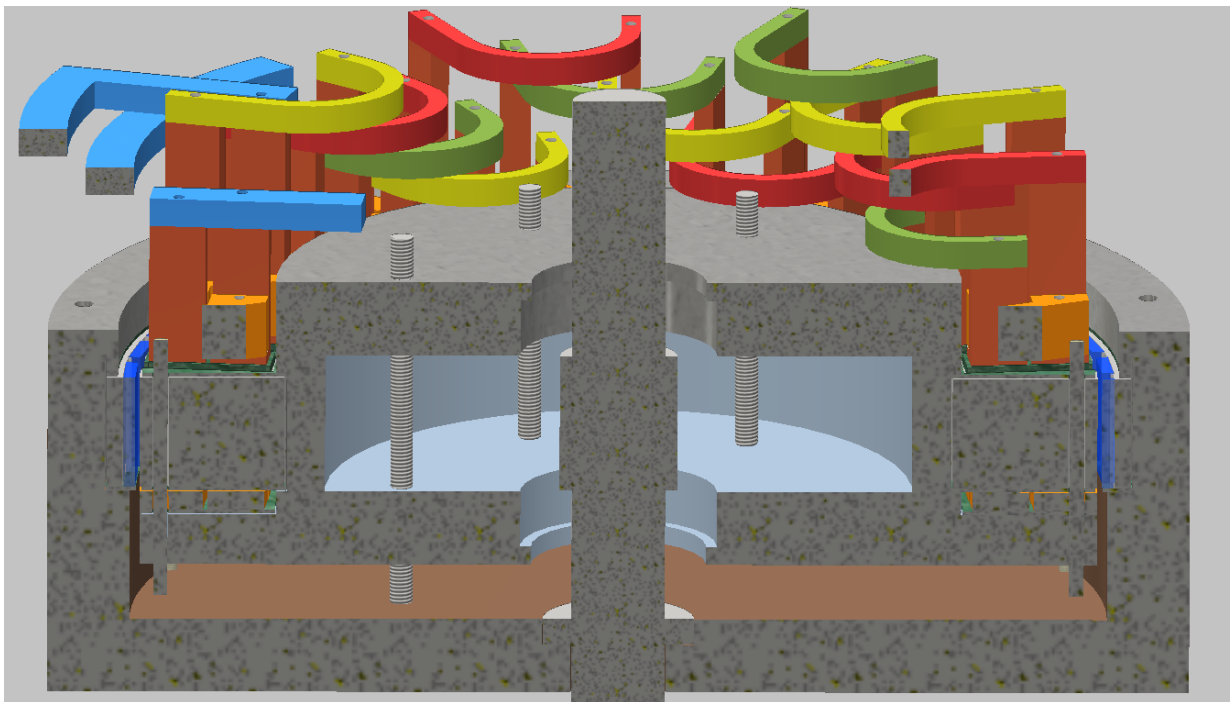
Cross-section view of the complete machine assembly. Machine dimensions as described in Appendix B.
